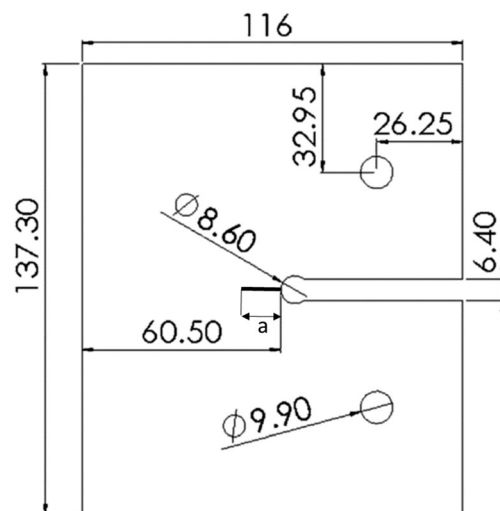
Key-hole fatigue specimen (dimensions in mm)
